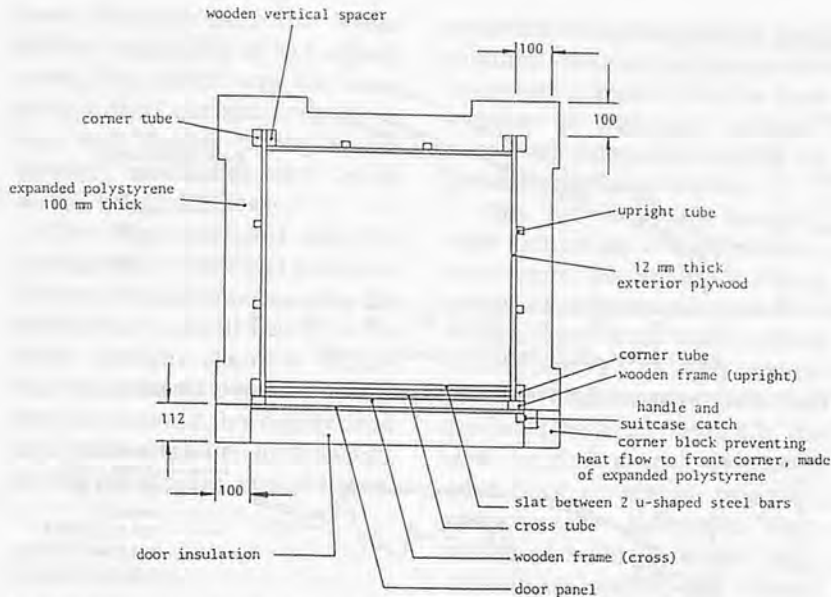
Cross-section of the night ventilated store horizontally cut at the centre. Dimensions are in mm.
